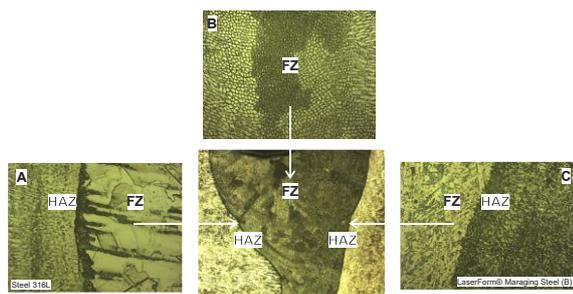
Weld seam of both materials at x 50 magnification and transition zones at x 500 magnification between: A) 316L steel and weld seam; B) within the weld seam itself and C) weld seam and LaserForm Maraging Steel (B).
